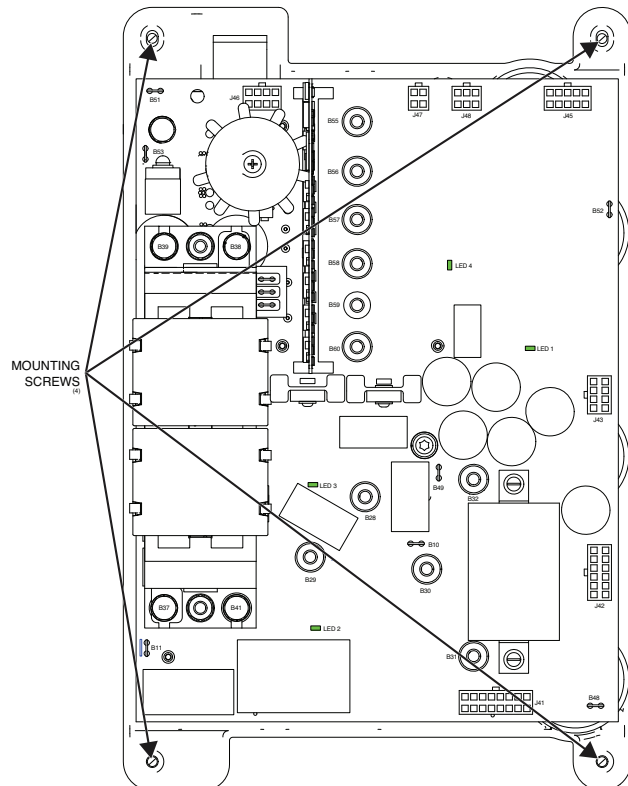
Main switchboard / power conversion assembly mounting hardware locations
